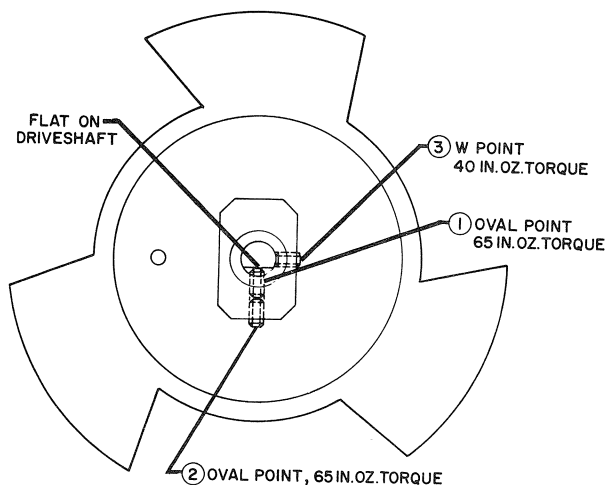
B. SECURING SHUTTER AND CAM ASSEMBLY
